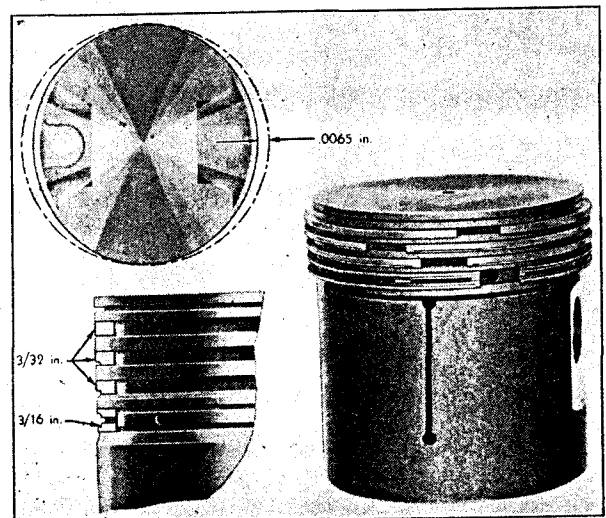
Details of Cadillac Pistons. LaSalle pistons are same except for size and ring arrangement
